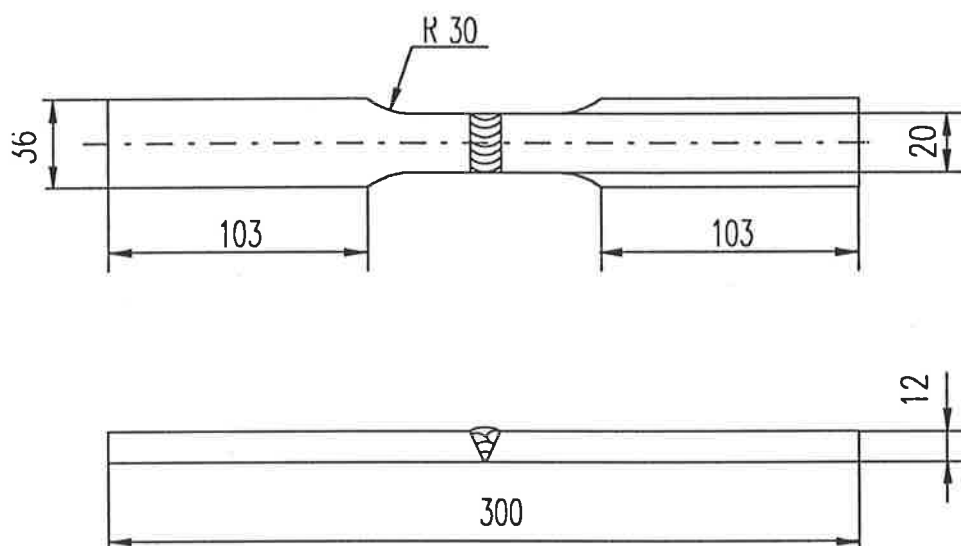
Dimensions of the fatigue test specimens (all dimensions are in mm)
